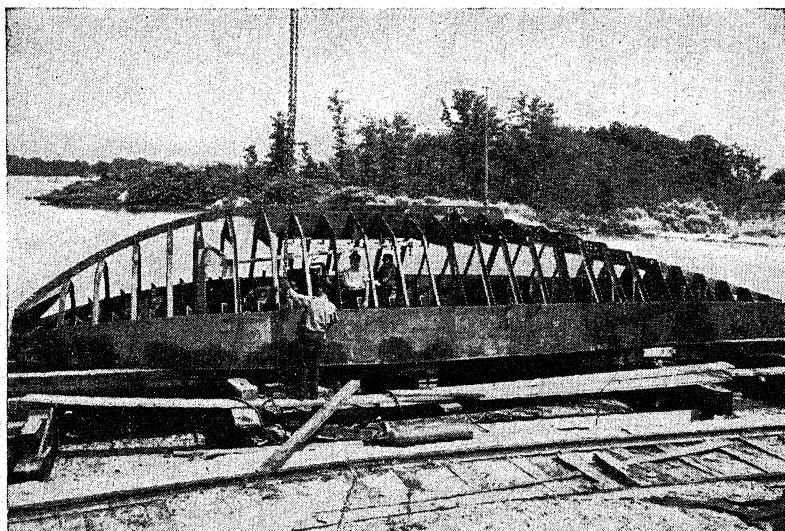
Construction view of towboat—shop-fabricated cross frames in place.
